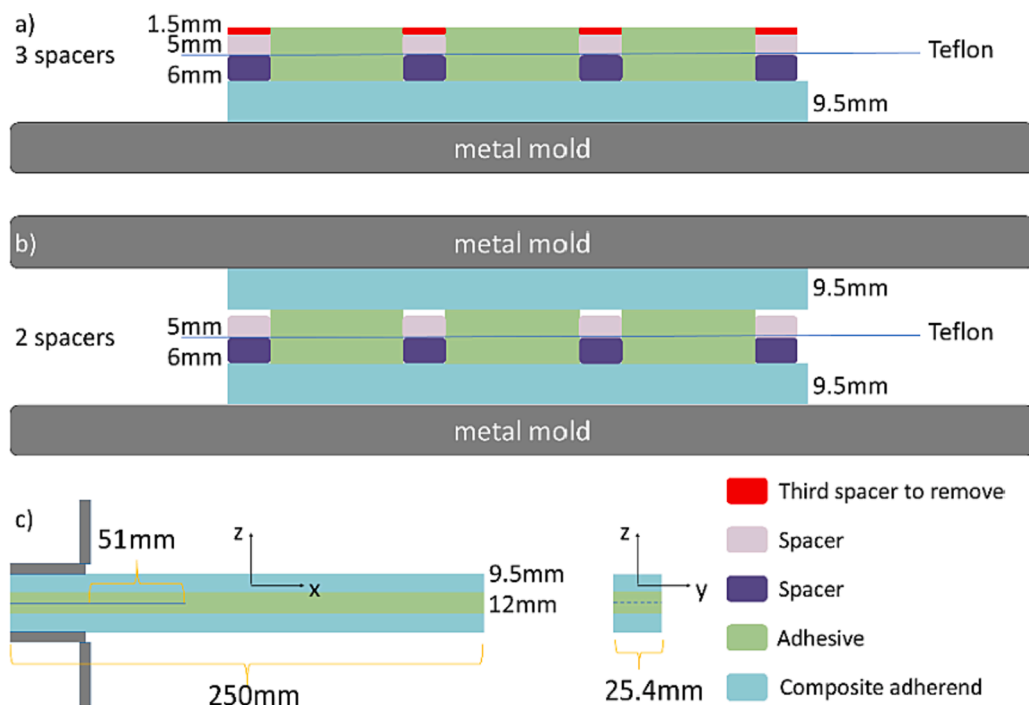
Illustration of the joint manufacturing method I by adding and removing additional spacers: a) before removing the additional spacers; b) removing the additional spacers and putting the top adherend and mold; c) sample illustration before tests with piano hinges.
